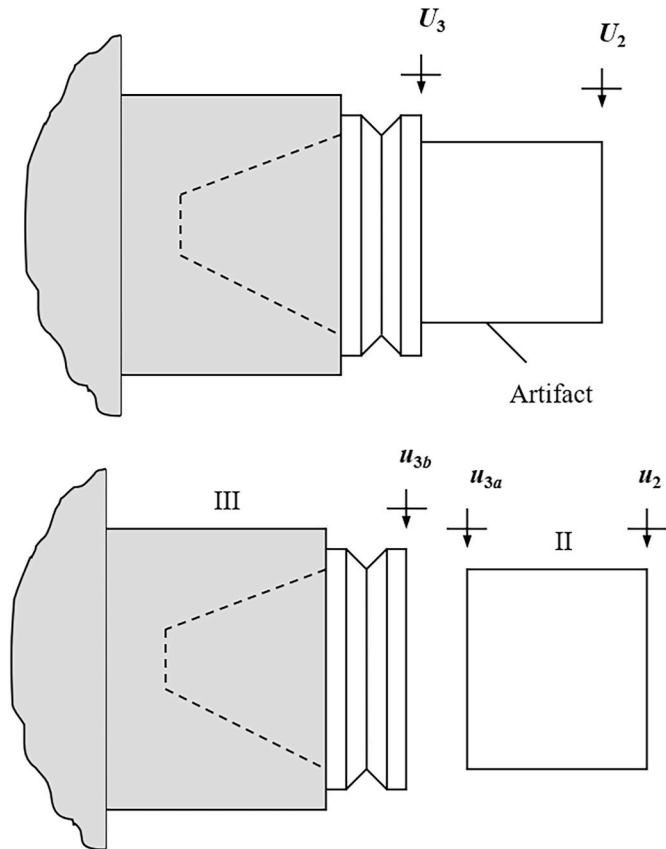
Artifact-spindle-machine model. (Top) assembly. (Bottom) components [14].
